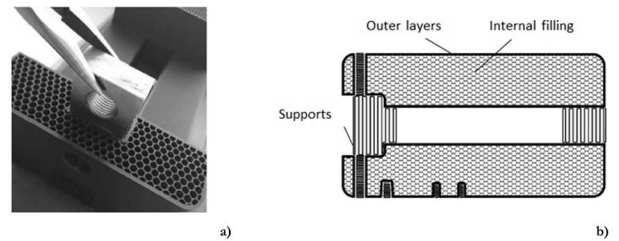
a) Inserting matrix into fixture cavity, b) Internal filling
